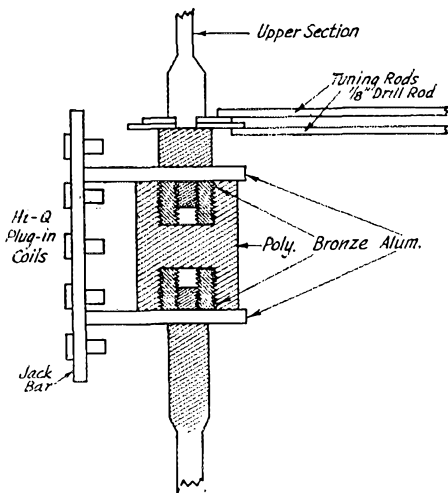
Construction details of the mounting for the rods and plug-in coil.
